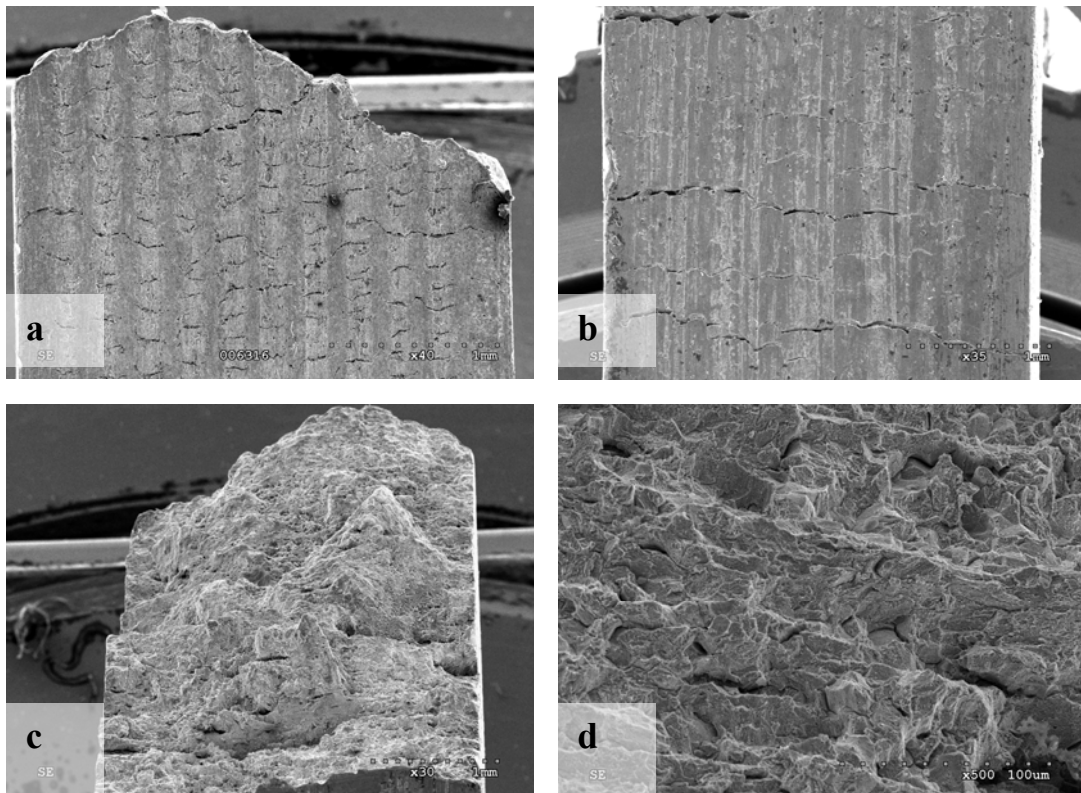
Lateral surface with many brittle cracks, close to the fracture of the charged parent metal (a) and flyer metal (b) of the composite I. Brittle-ductile fracture surface with secondary cracks of the composite I (c) and composite II (d) after 30 thermal cycles
